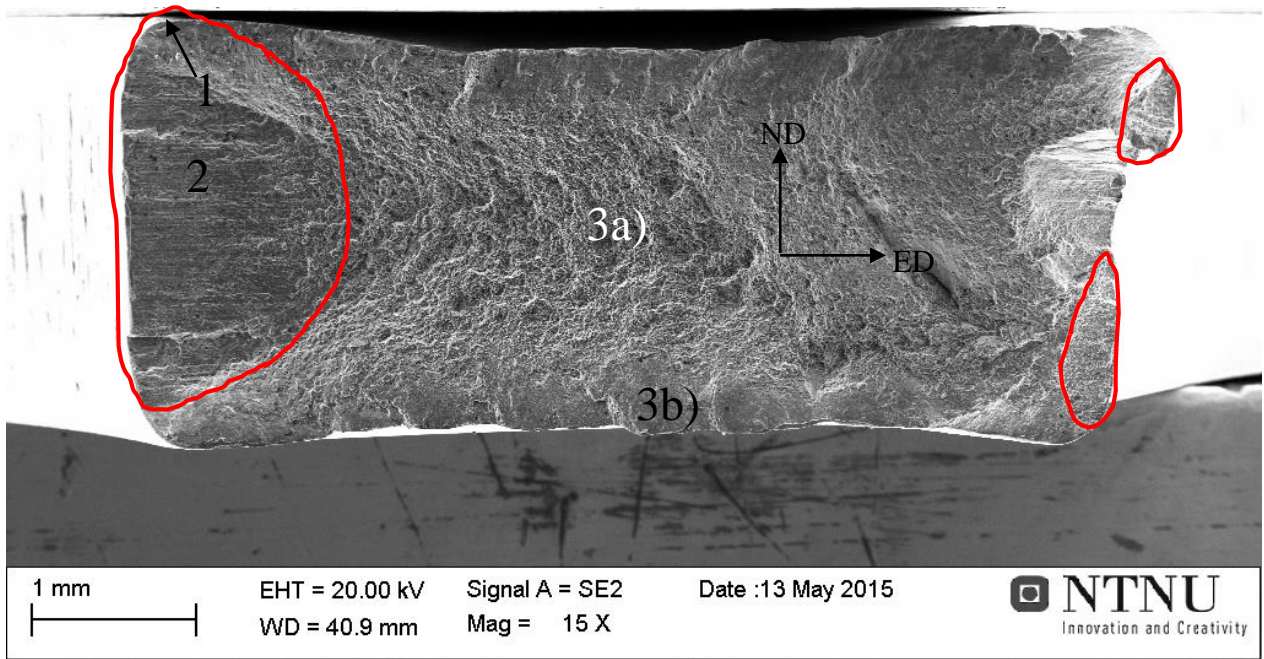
An overview of the fractured surface of AA6082 T4 with the shortest fatigue life, 15X magnification. The fatigue fractured areas are enclosed by the red lines.
